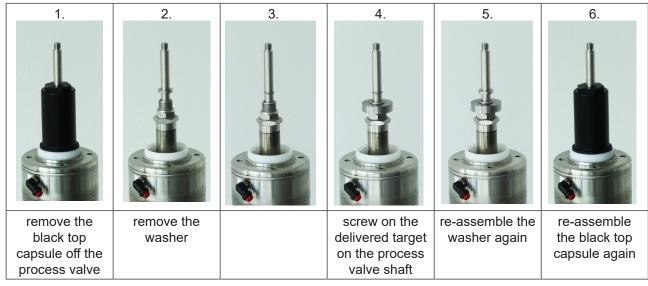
Assembly sequence for mounting the external target on the process valve D4 series
